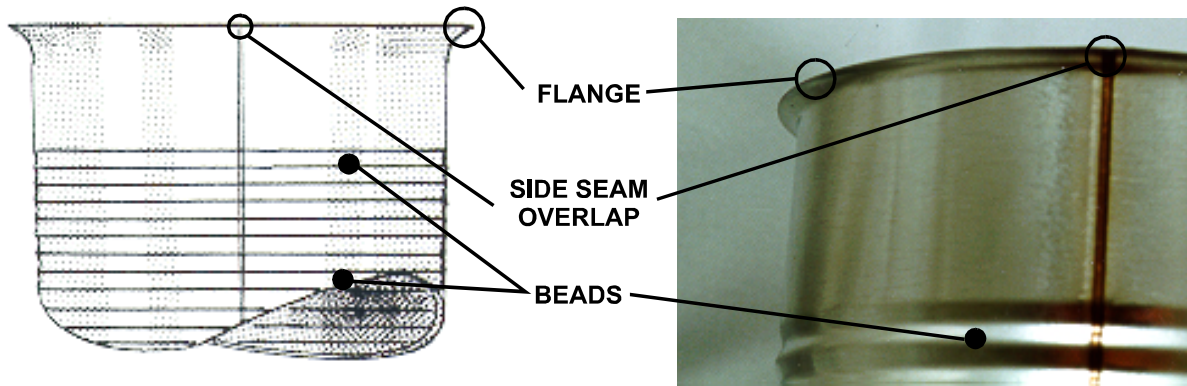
b - Three Piece Can - Welded Side Seam - Empty Can
